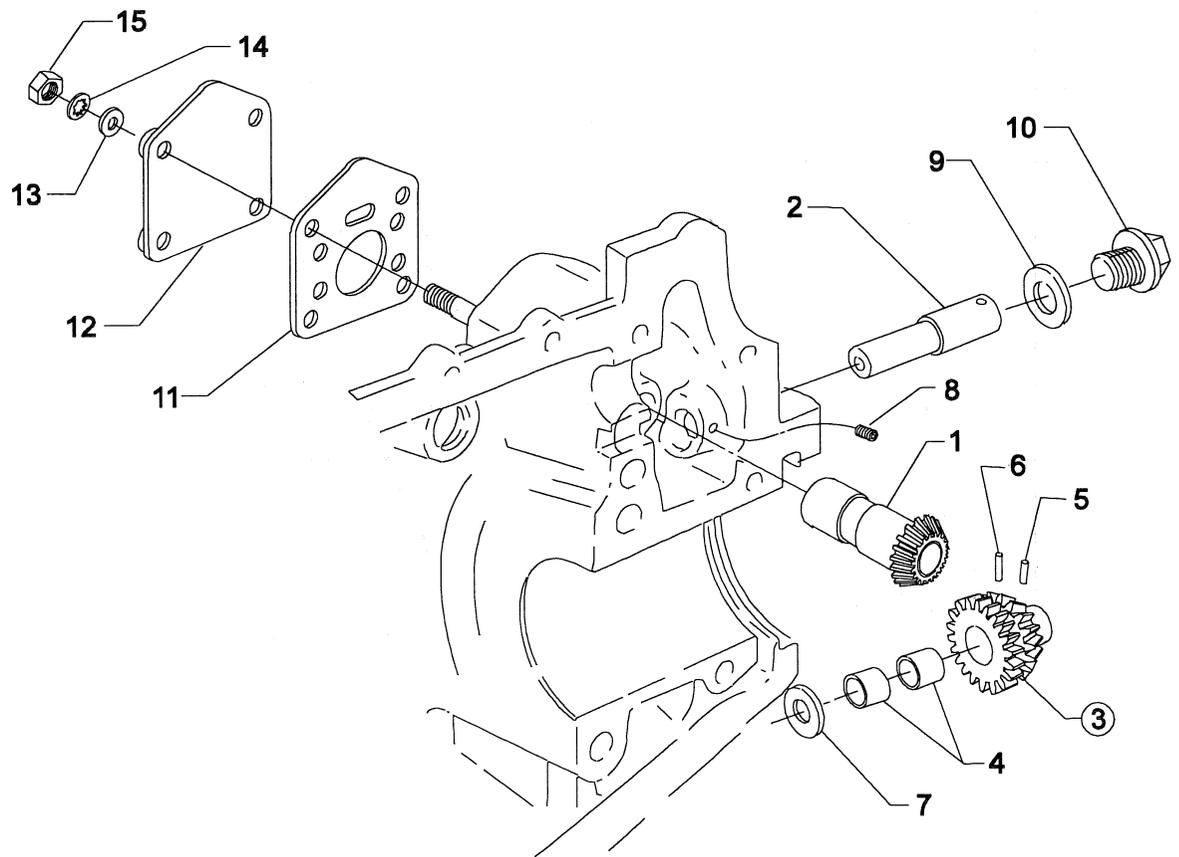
PROPELLER GOVERNOR DRIVE ASSEMBLY
